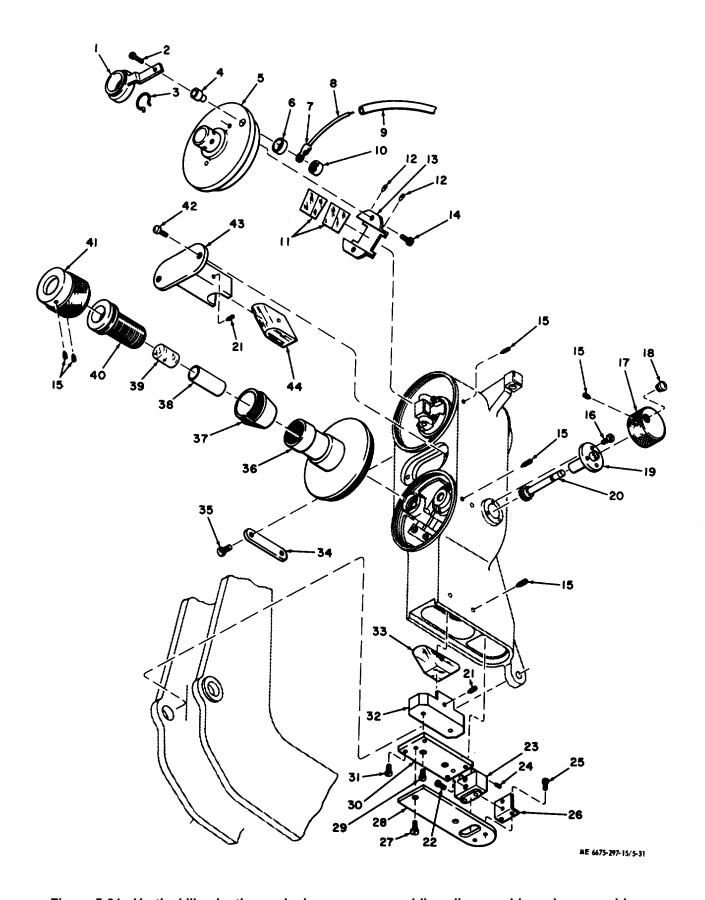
Vertical illumination and microscope assemblies, disassembly and reassembly.
